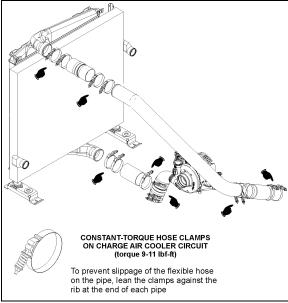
CHARGE AIR COOLER HOSE CLAMPS 051
